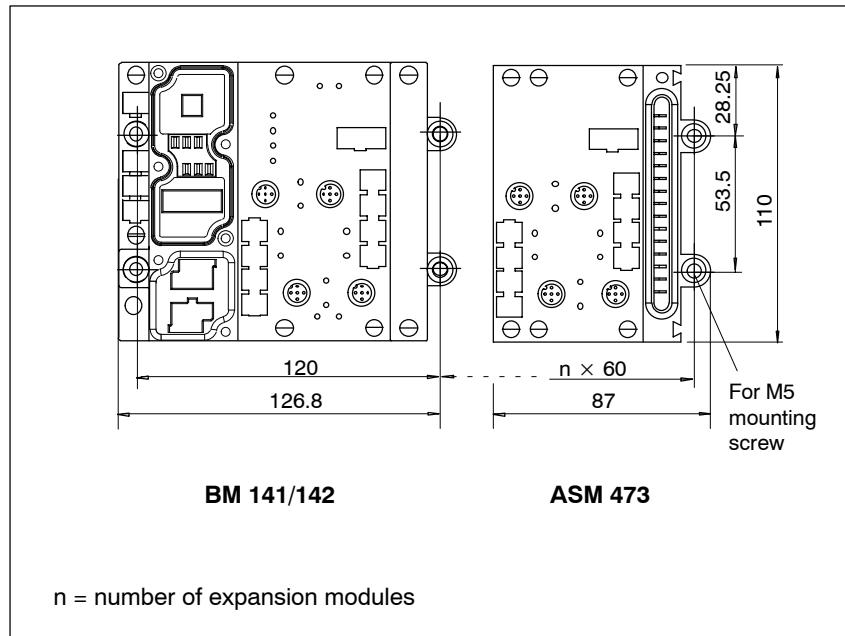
Dimensions for mounting holes for basic and expansion modules.
